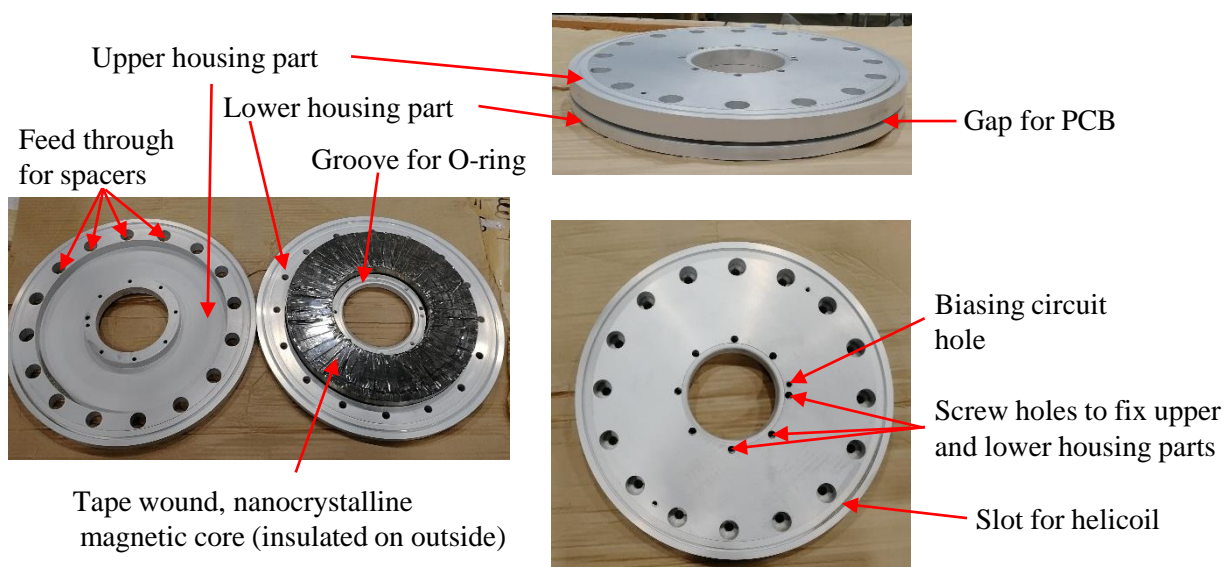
Assembly of the two housing parts (primary winding) and the insulated, nanocrystalline tape wound core
